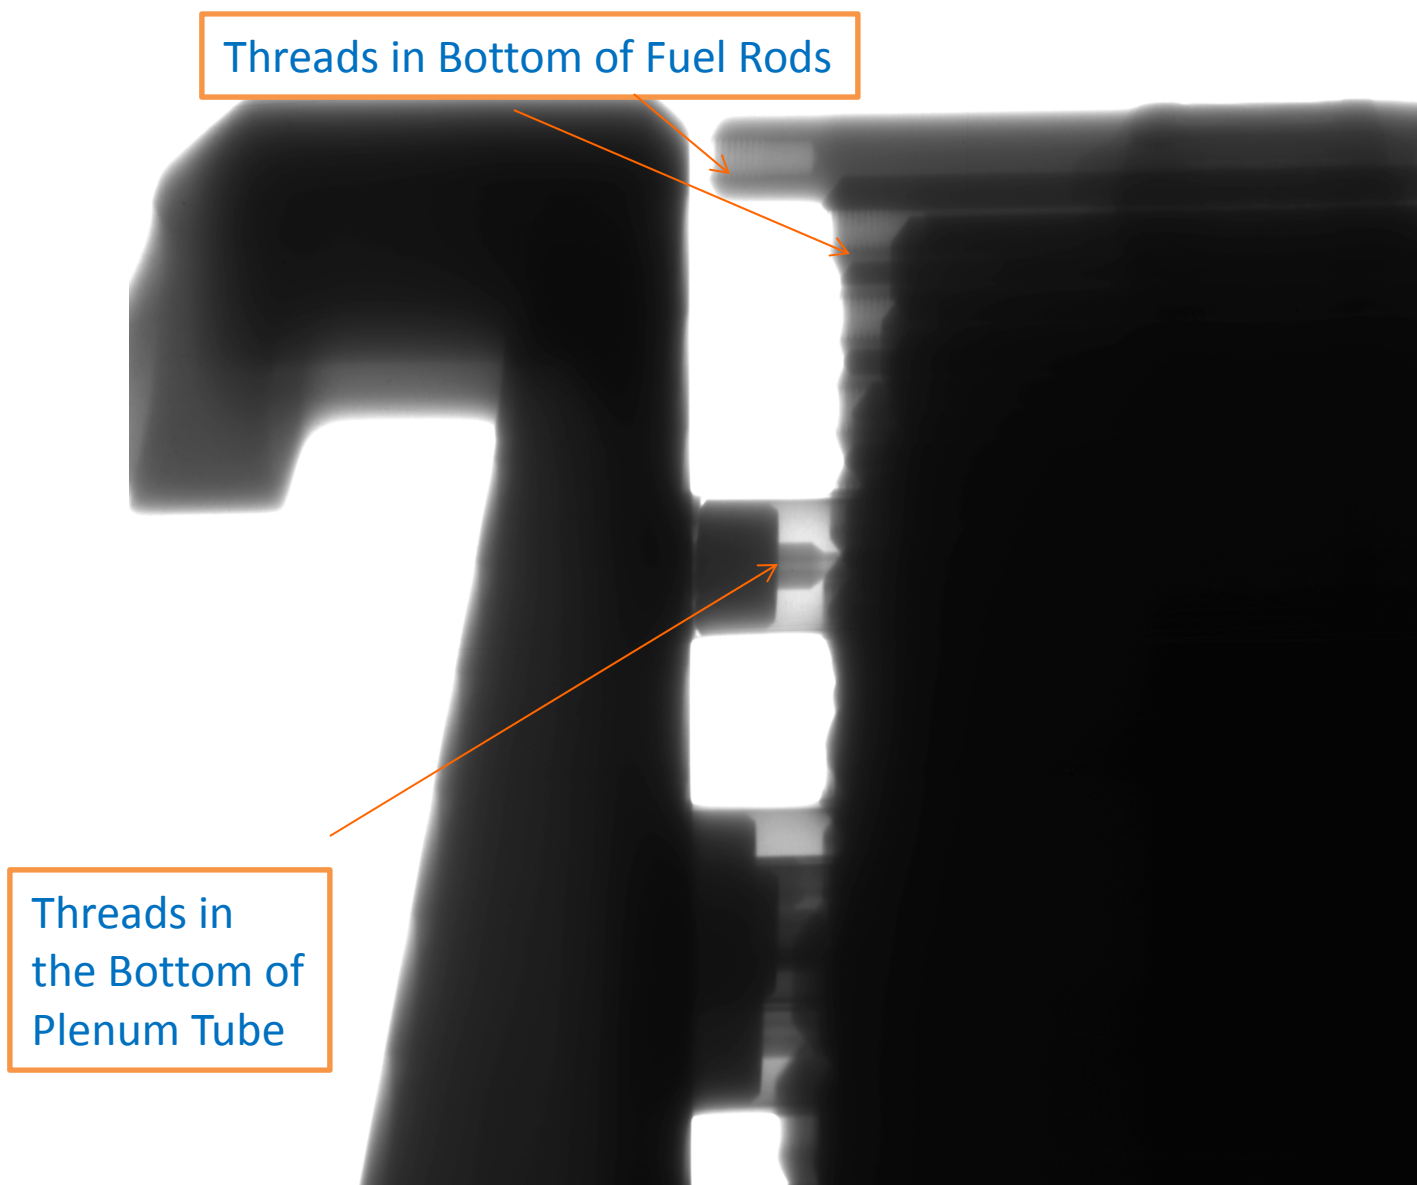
Additional bottom image of INL dummy fuel assembly showing threads in fuel rods and plenum tubes
